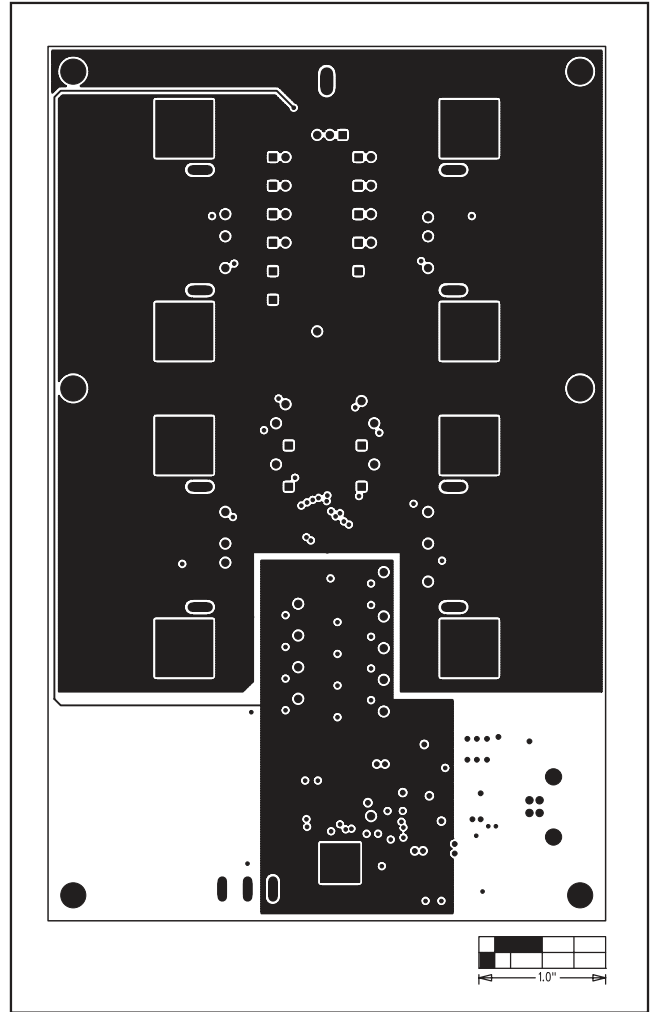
MAX5961 EV Kit PCB Layout—Power Planes (Layer 3)
